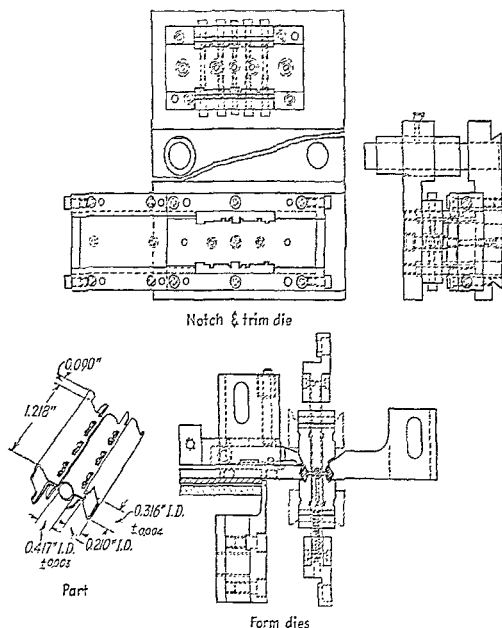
Tools for producing radio-tube plates on a multiple-slide press.¹⁰
